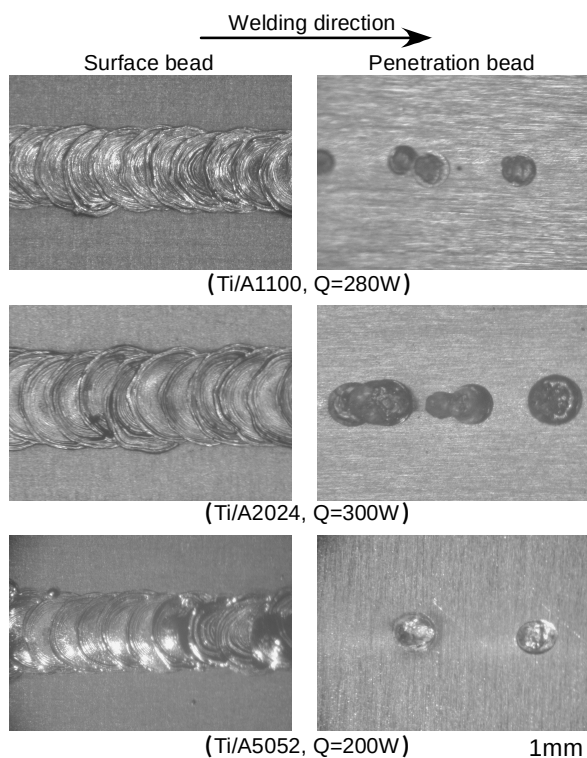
Appearances of welded joint. (PW=5.0ms)
